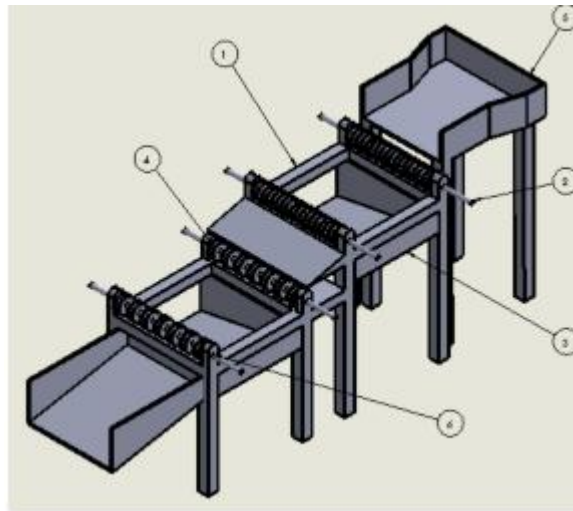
Assembly of tomato sorting machine with description of 1) Frame, 2) Shaft, 3) Collecting bin, 4) Pulley, 5) Feeding tray, 6) Deep groove ball bearing
